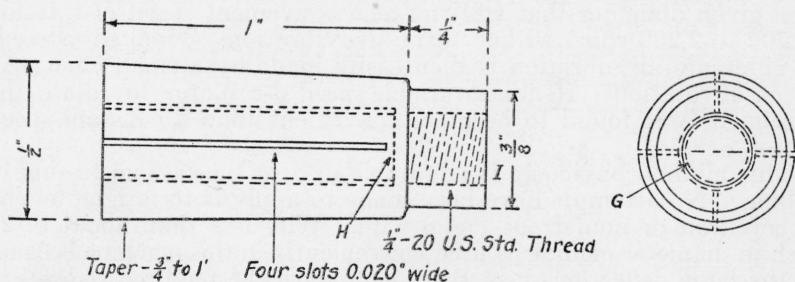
Gripping device for attaching specimens to bearing boxes of R. R. Moore machine.
